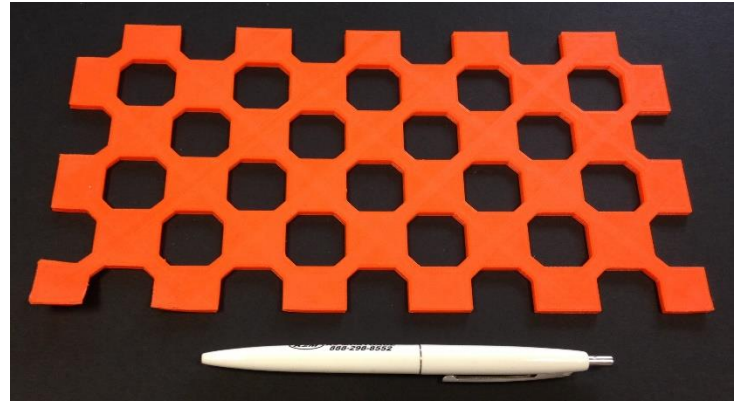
Max size checkerboard part used to determine if build profile parameters were optimized for part removal
